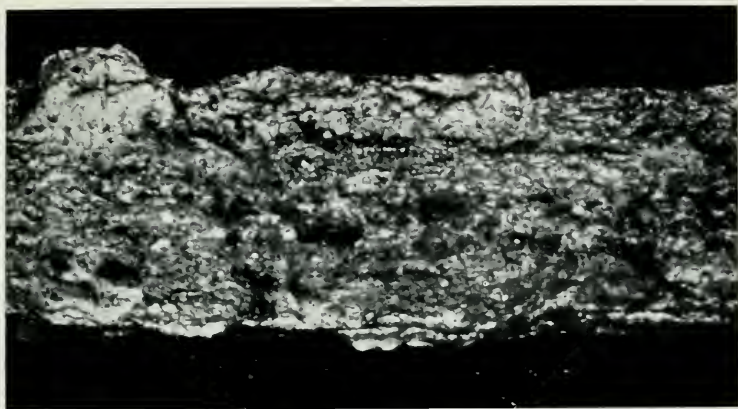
Cleavage Fracture of Swedish Iron. Magnified 30 diameters.
